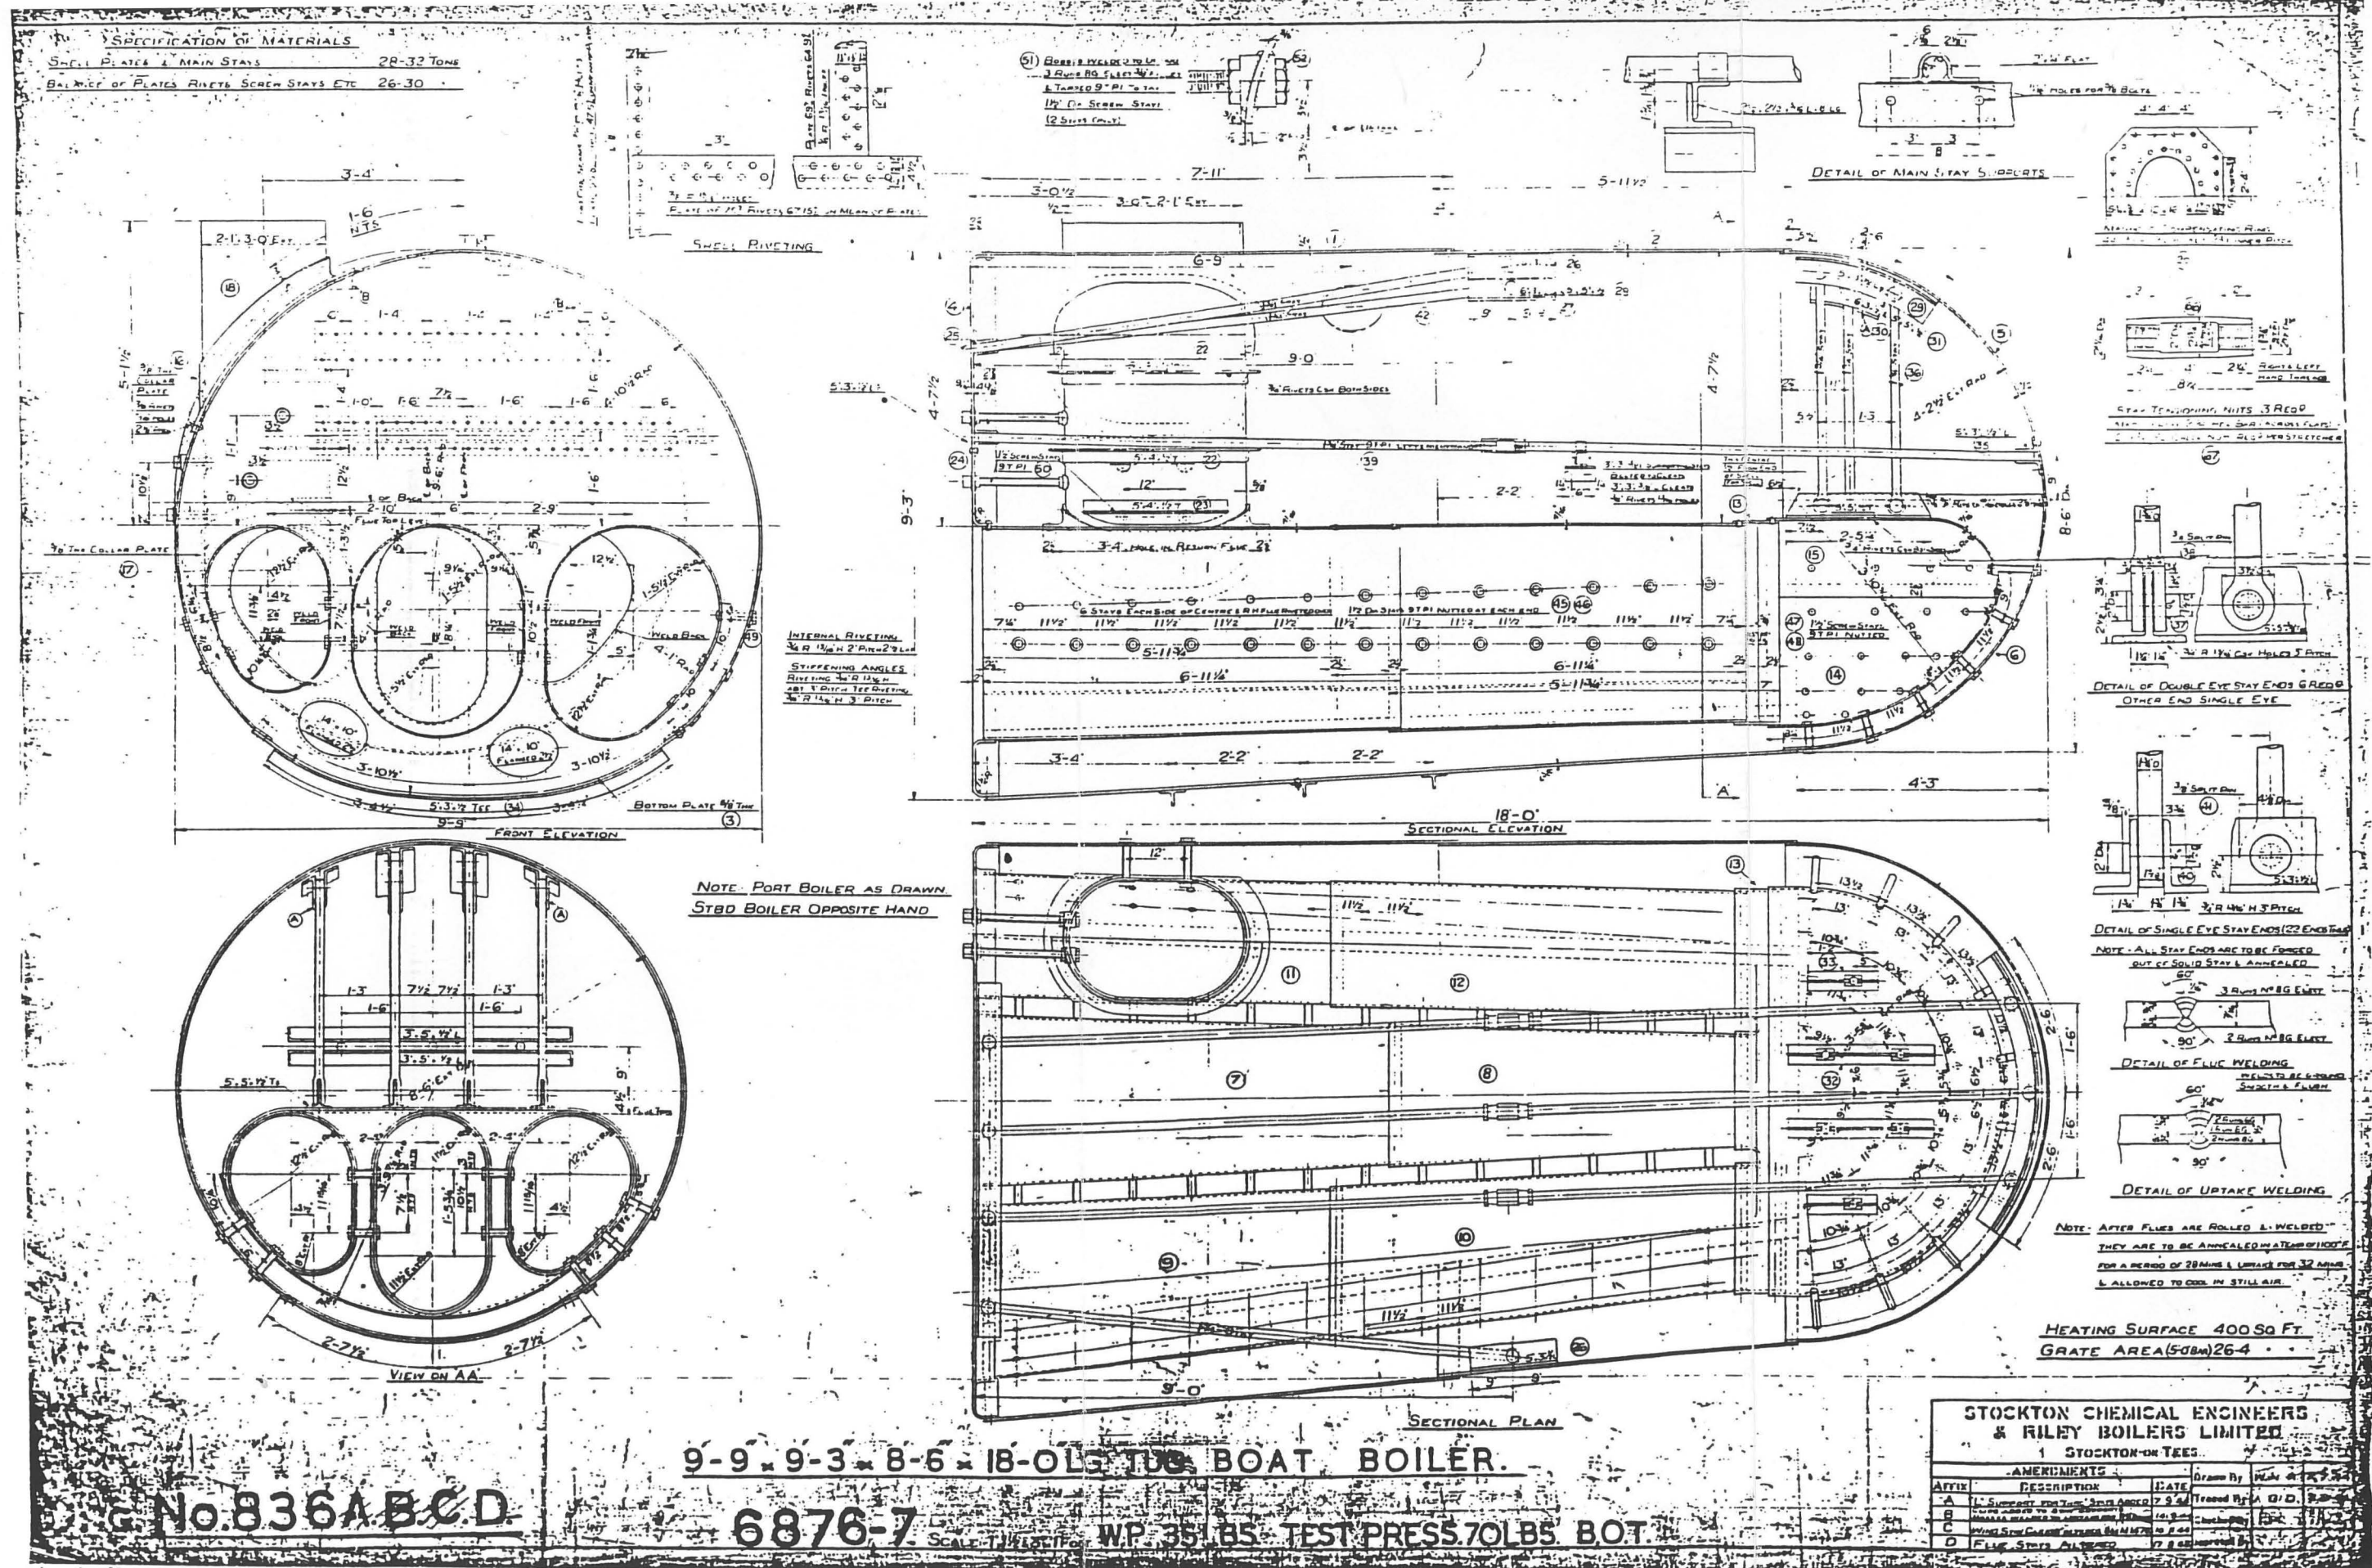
Boiler Details: construction plans for replacement boilers installed in EPPLETON HALL in 1944. SFMNH Coll. #555 Rec. #1761
